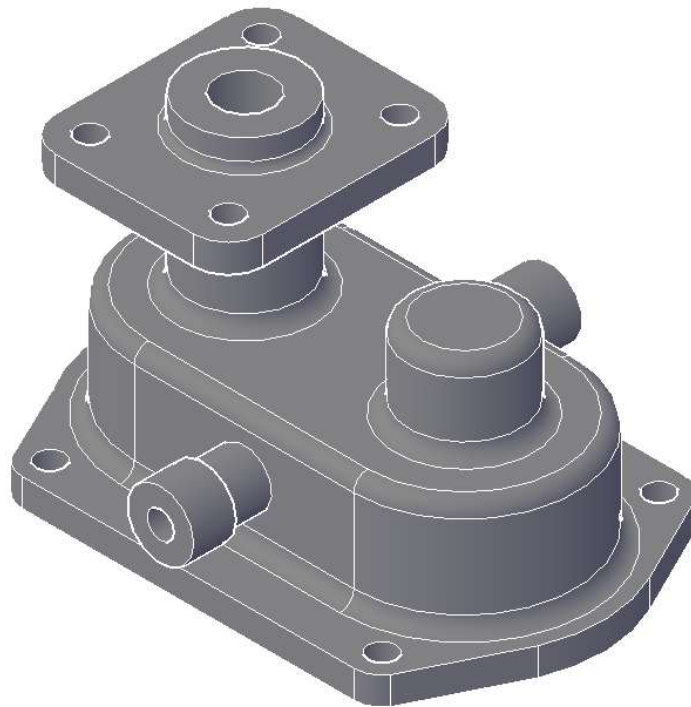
Isometric View of the Mechanical Gearbox Assembly
